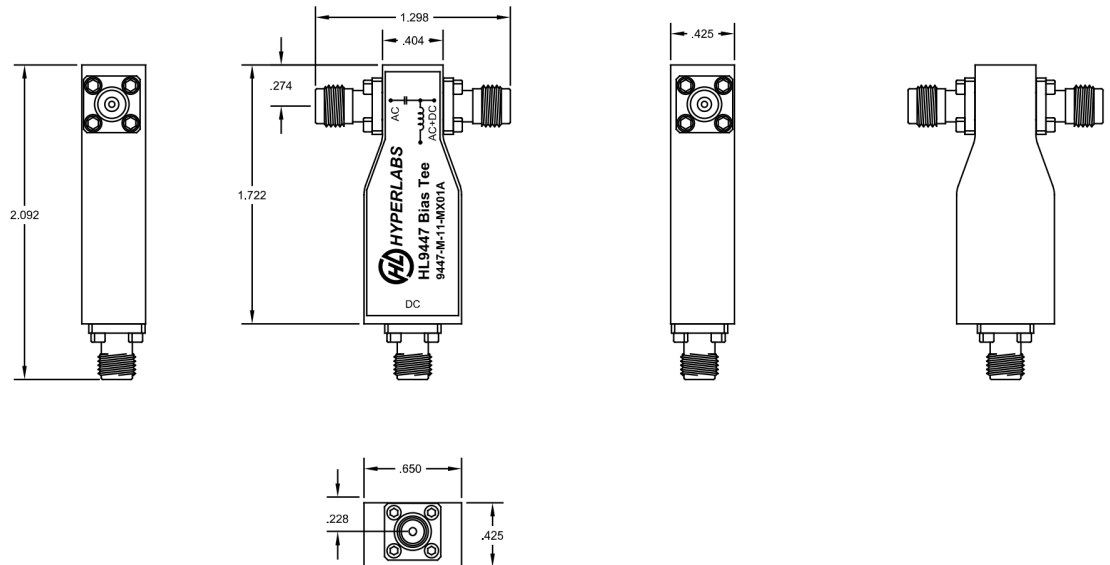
HL9447 with SMA DC bias port Mechanical Drawing
